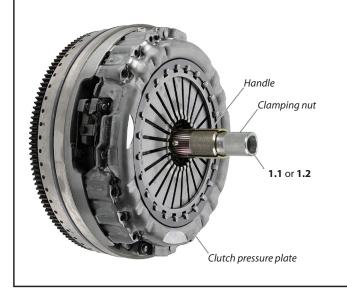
Mount the clutch pressure plate and remove the centring tool afterwards.
